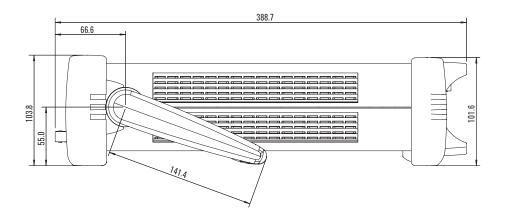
Dimensions (side view, with handle and bumper, in millimeters, nominal)
